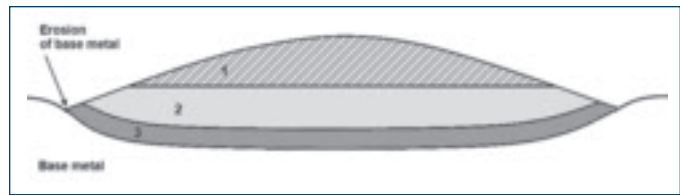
Cross section (model) of solidified braze or solder droplet after reactive wetting, spreading accompanied with local dissolution of base metal. 1 = brazing alloy or solder; 2 and 3 are reaction product layers.
